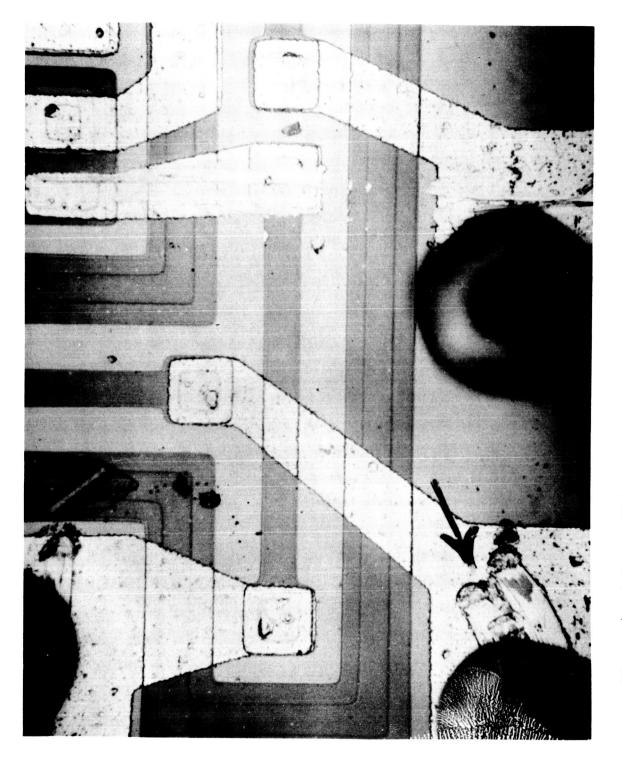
A Smear Which Could Cause a Poor Thermocompression Bond
